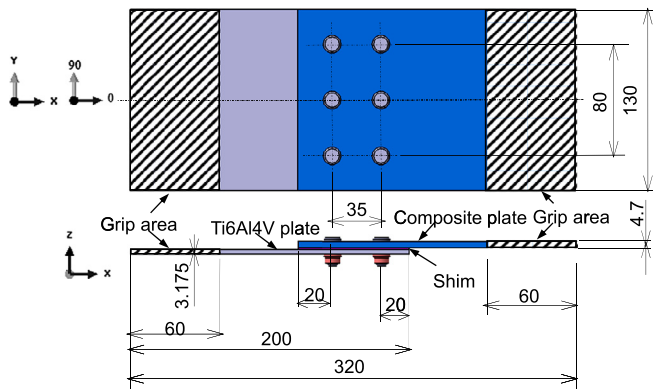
Specimen geometry dimensions (all dimensions in mm).
